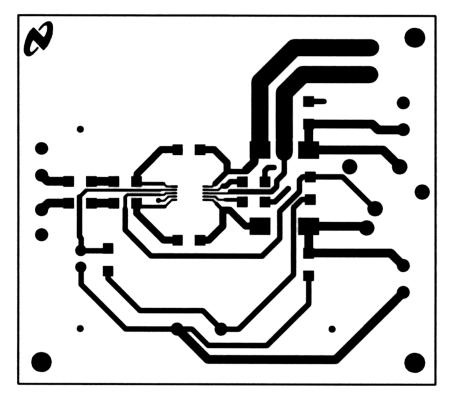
Recommended MM PC Board Layout: Component-Side Layout
